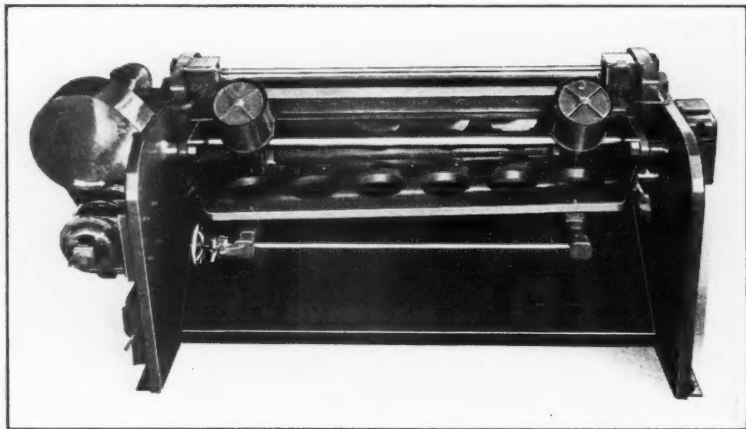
Rear View of Cincinnati All-steel Shear, Showing Adjustable Back Brace
